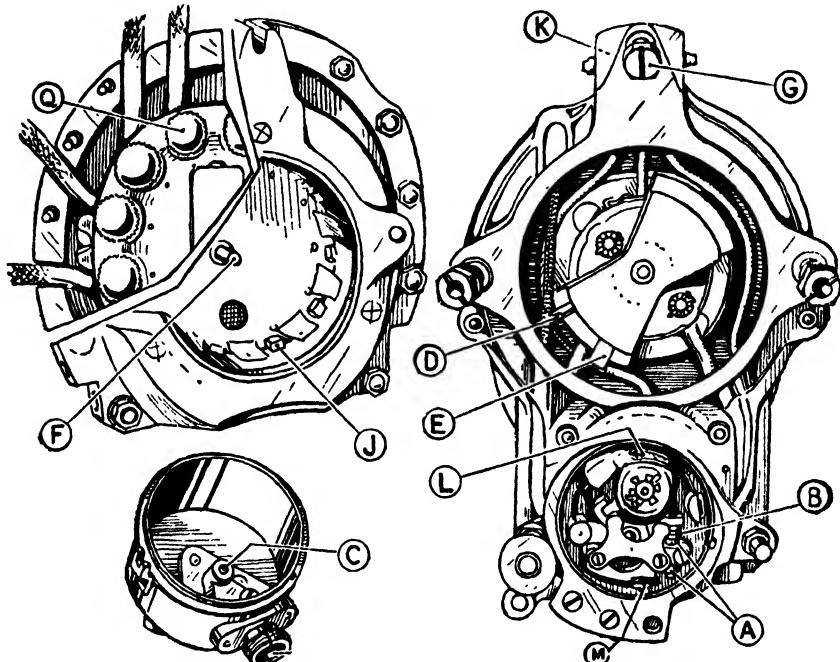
Magneto Contact Breaker with Distributor Removed.
